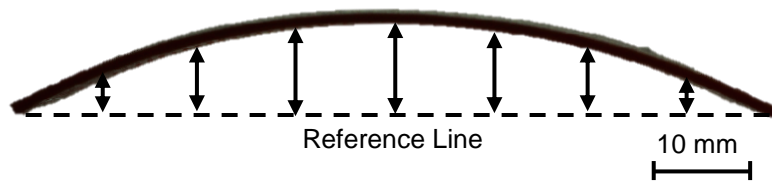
Pseudo-Almen strip deflection after shot peening.
